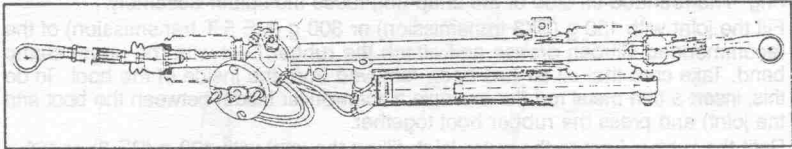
Sectional view of the power-assisted steering. The hydraulic cylinder is located below the steering rack.
